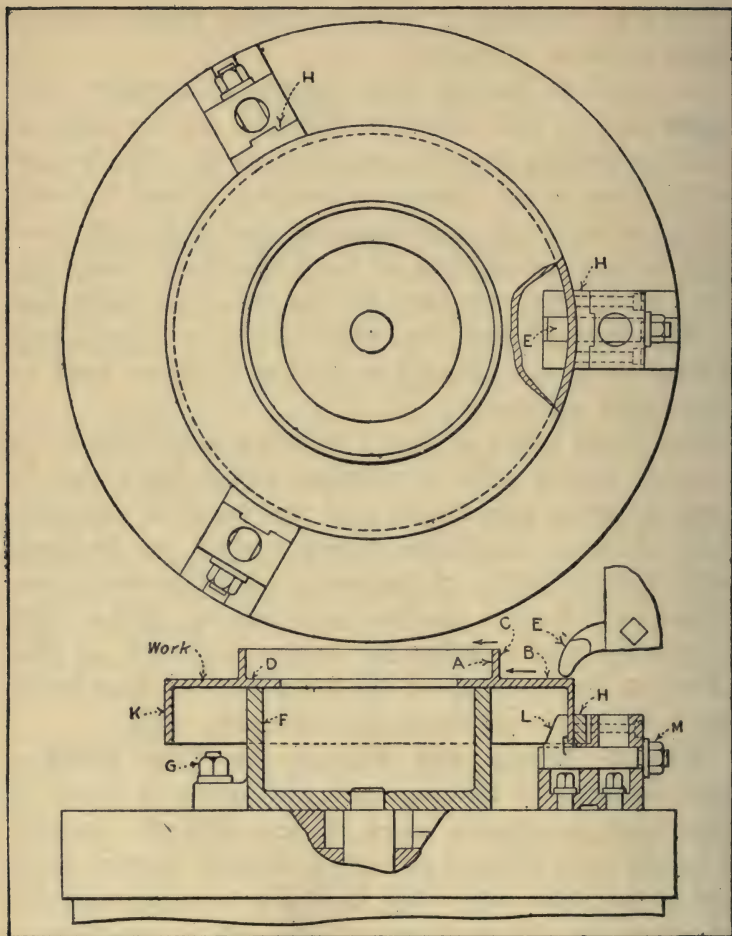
METHOD OF HOLDING THIN WORK ON A VERTICAL BORING MILL
